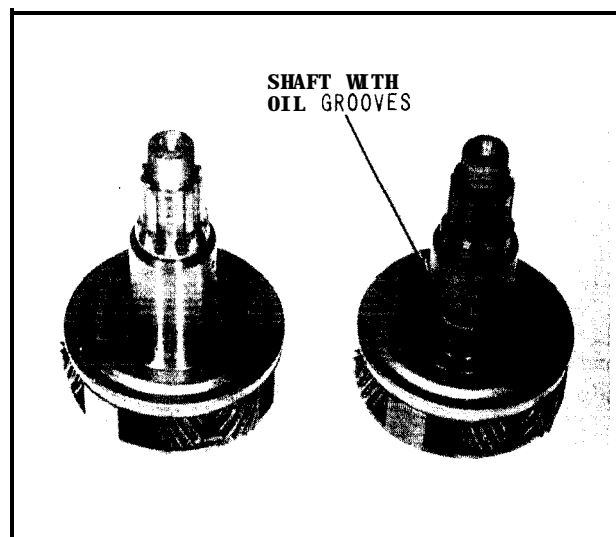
Late and Early Model Pinion Cage and Output Shafts
